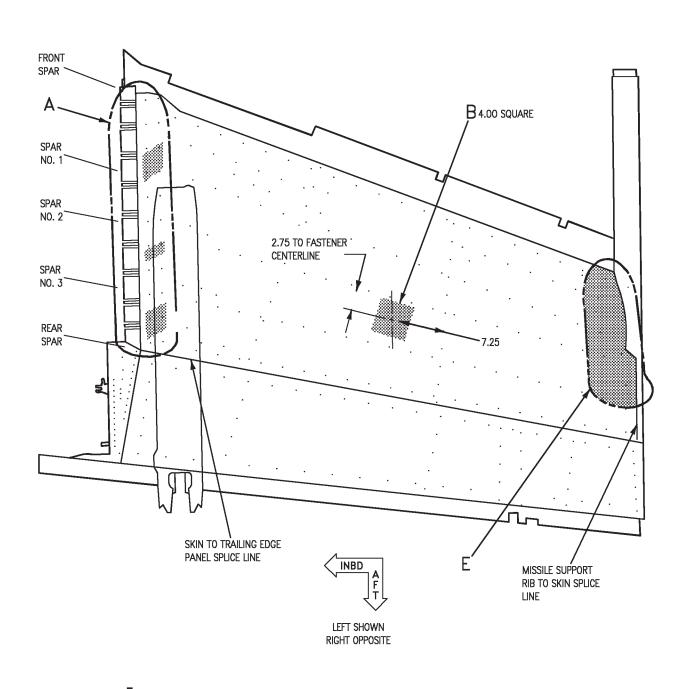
Outer Wing Lower Surface Inspection Areas (Sheet 1)
